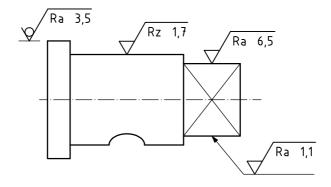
Surface texture requirements — Cylindrical and prismatic surfaces
